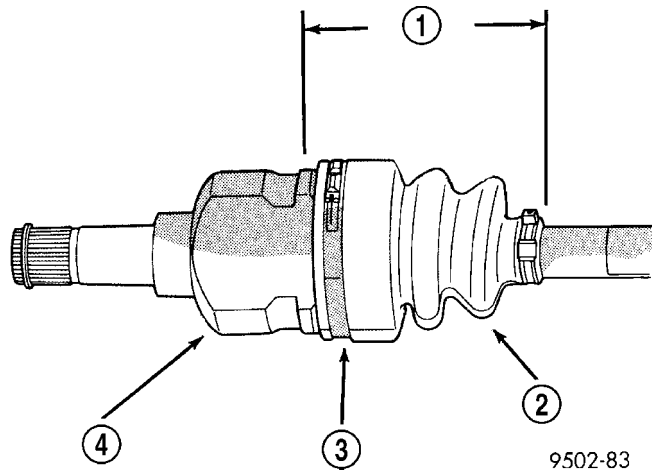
Sealing Boot End to End Length with Silicone Boot
